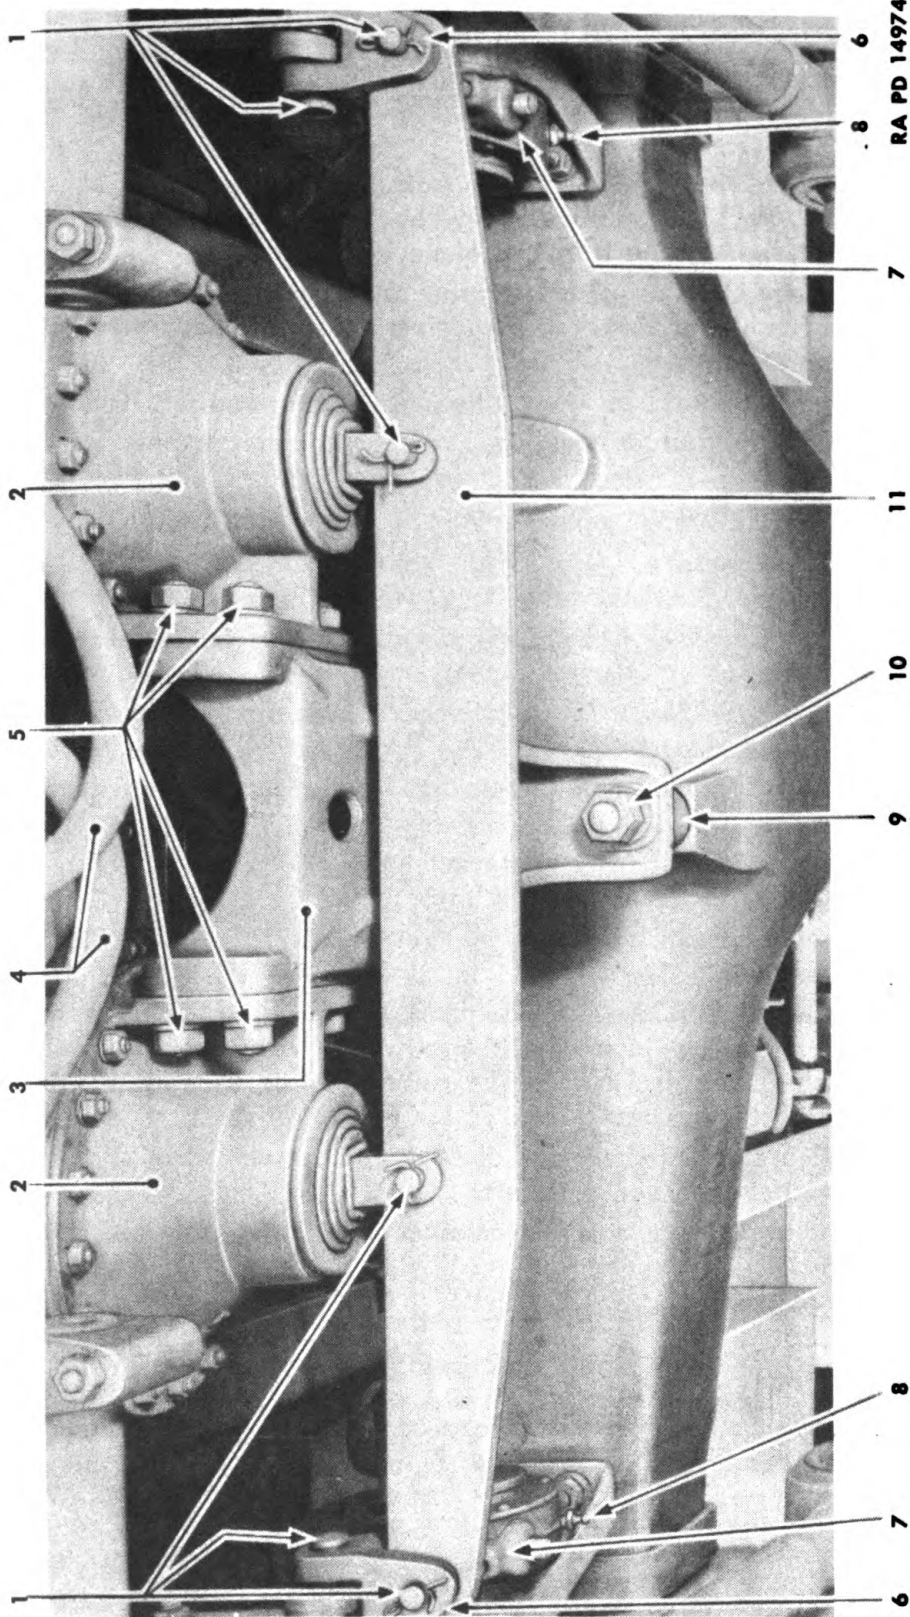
Rear Brake Diaphragm Equalizer Assembly
